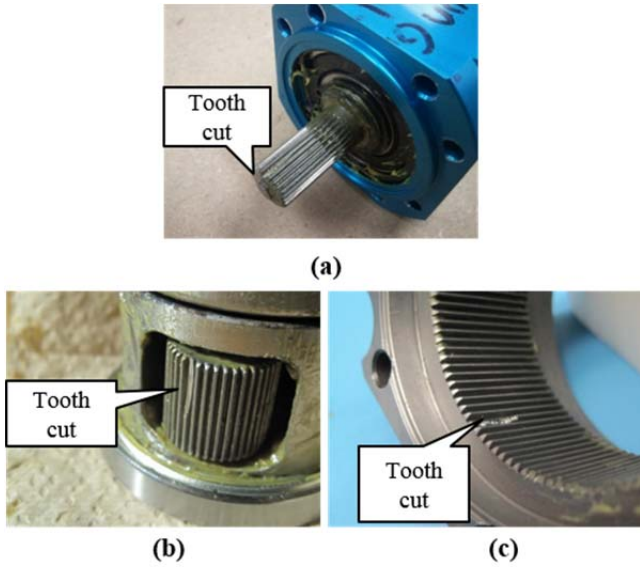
Seeded faults: (a) sun gear fault, (b) planet gear fault, (c) ring gear fault.
